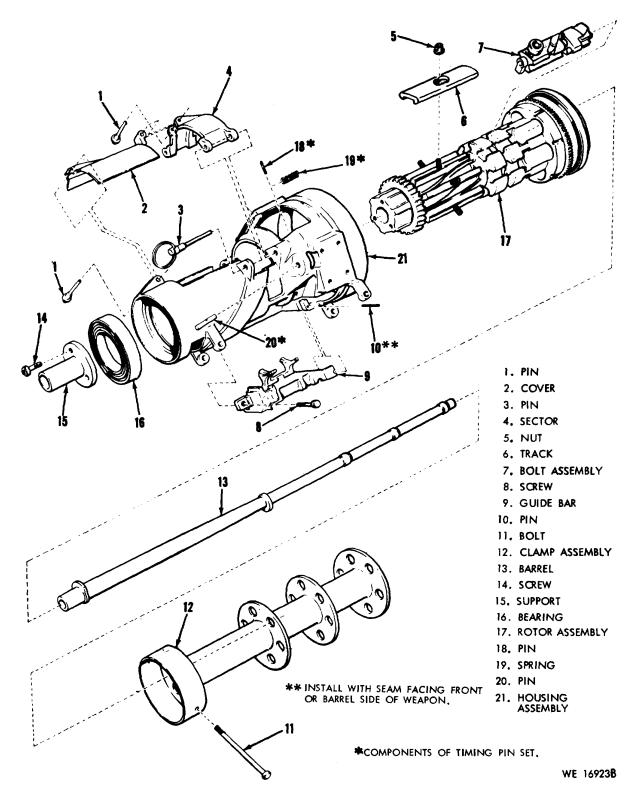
7.62 Millimeter machine gun M14--partially exploded view.
